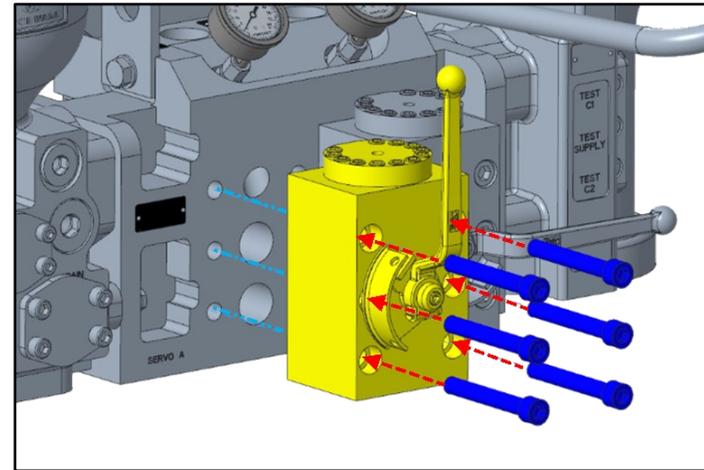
Isolation Valve Mating Surfaces Cleaning
